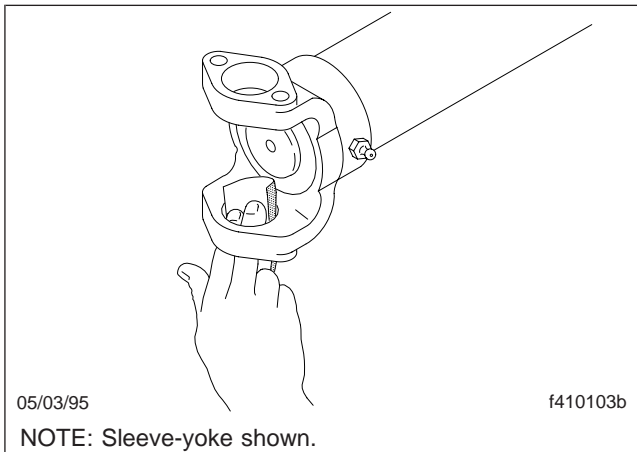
, Smoothing a Full-Round Yoke Cross-Hole
